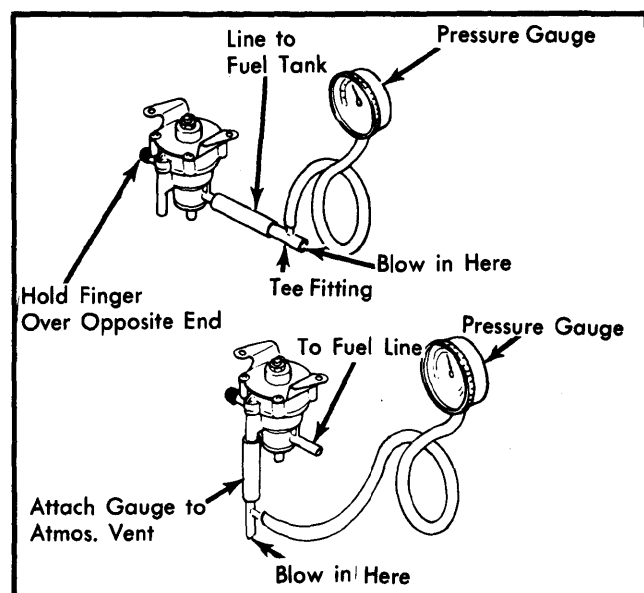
Testing Check and Cut Valve (Exc. B2000)
